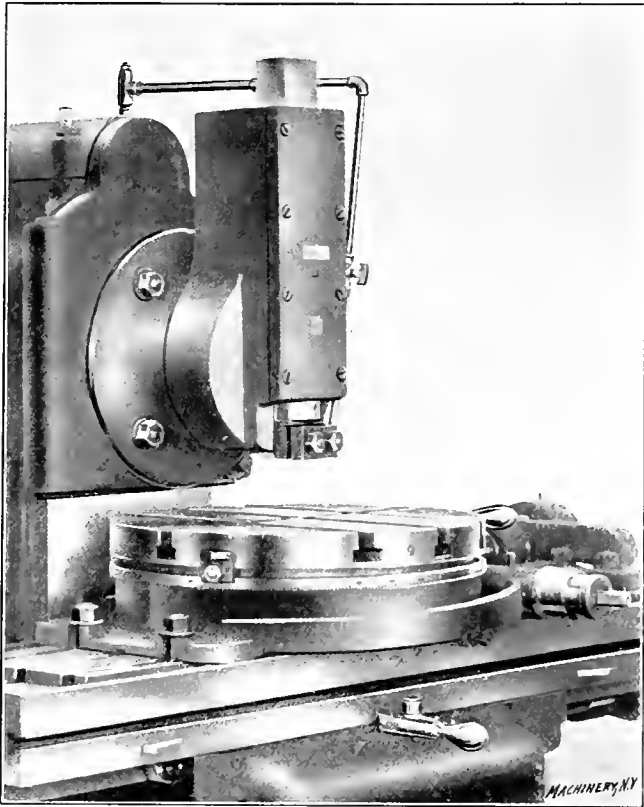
Slotting Attachment with Adjustable Stroke and Quick Return, for Milwaukee Millers
